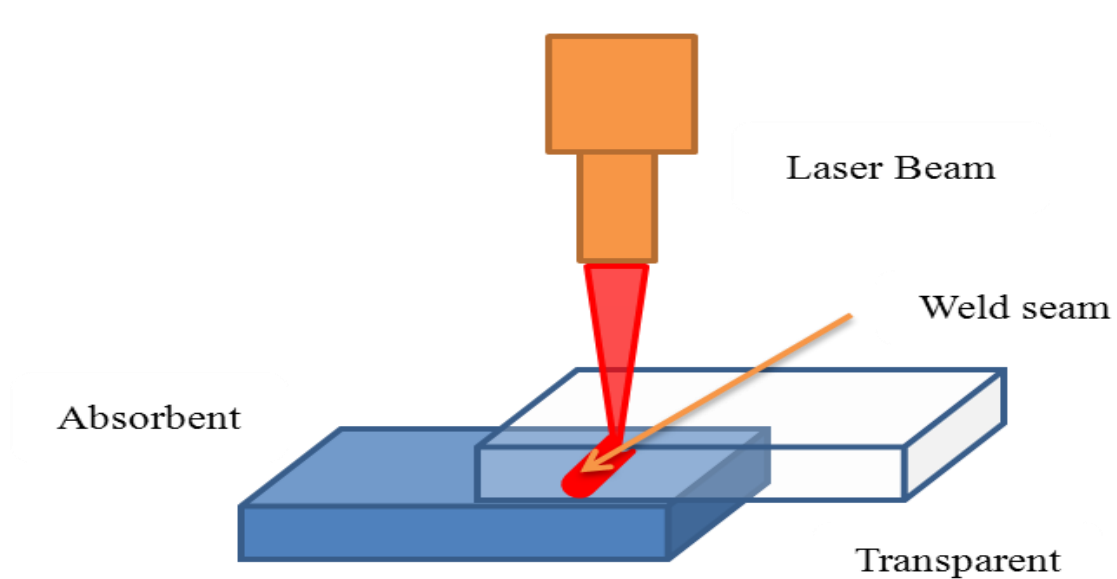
Overlap welding with a laser beam (serial welding)
